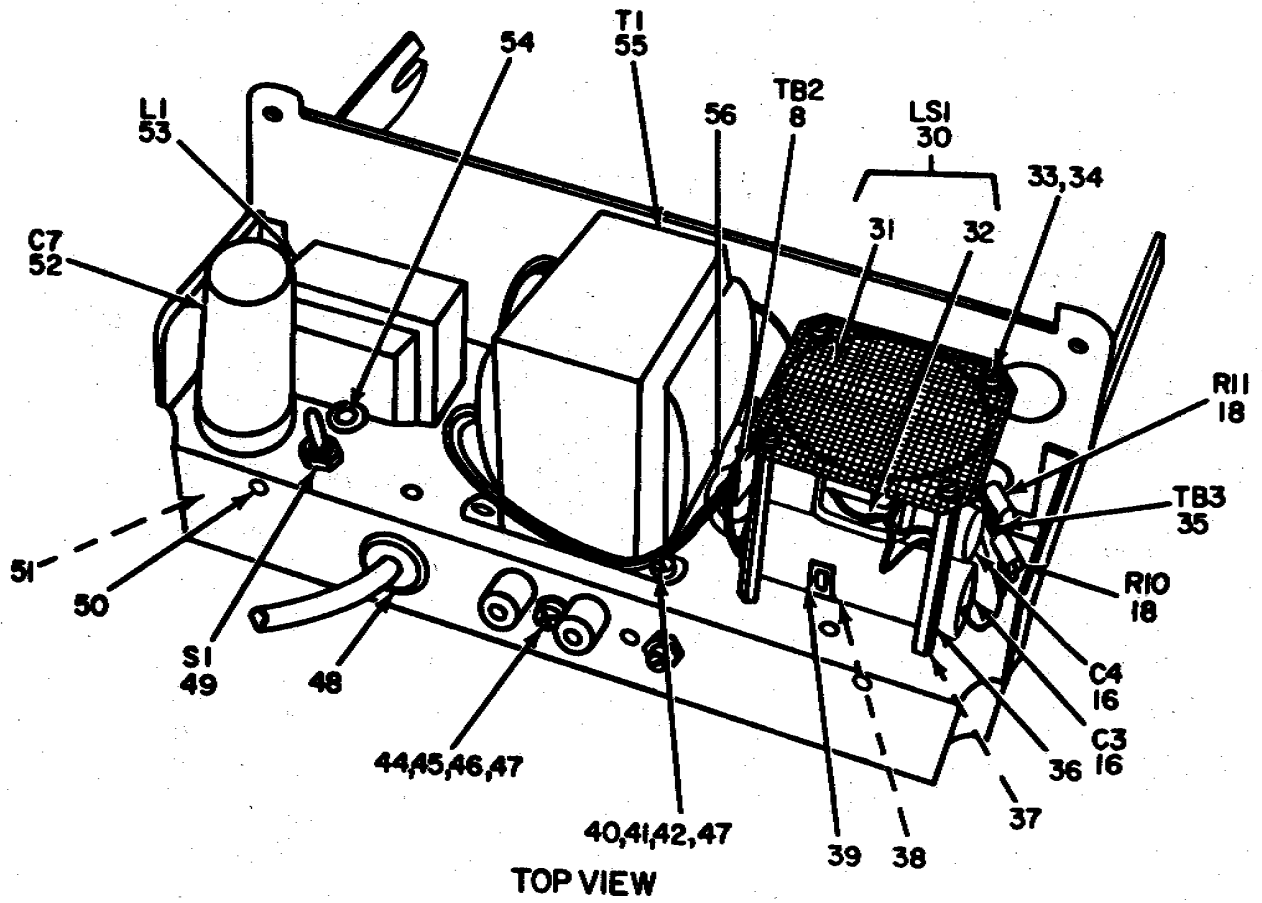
Power Supply PP-3990/FRC-93, Chassis Assembly (Sheet 1 of 3).
